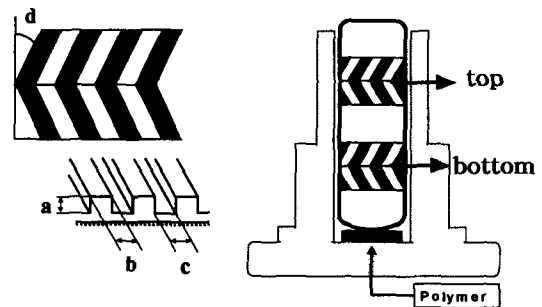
Geometry of herringbone-grooved hydrodynamic bearing.
